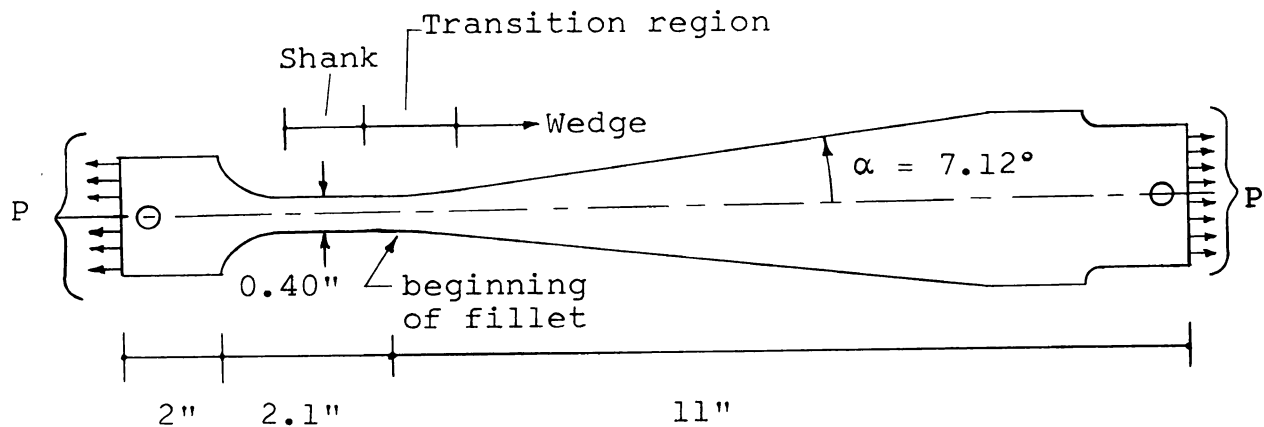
Sketch showing shape and approximate dimension of tapered model used.
